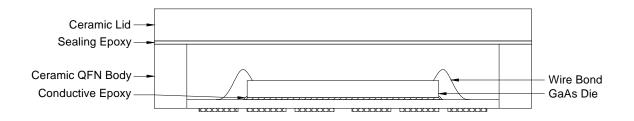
A cross-sectional drawing of a typical QFN package with GaAs die and mechanical attachment features.
